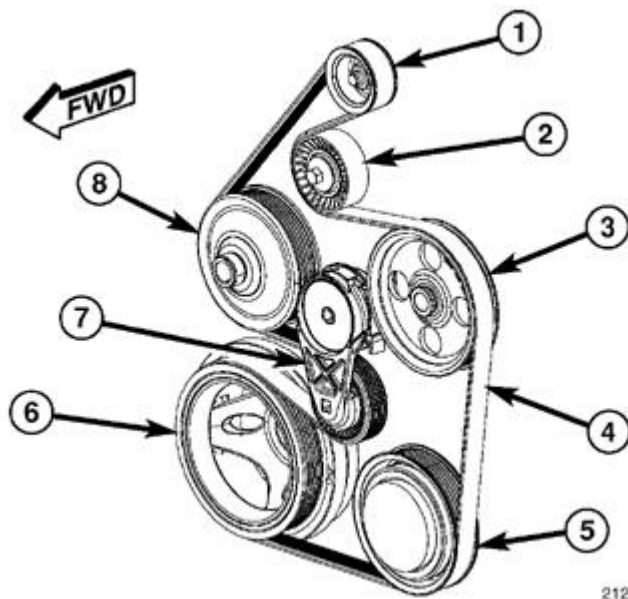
Identifying Accessory Drive Belt Routing - 5.7L
